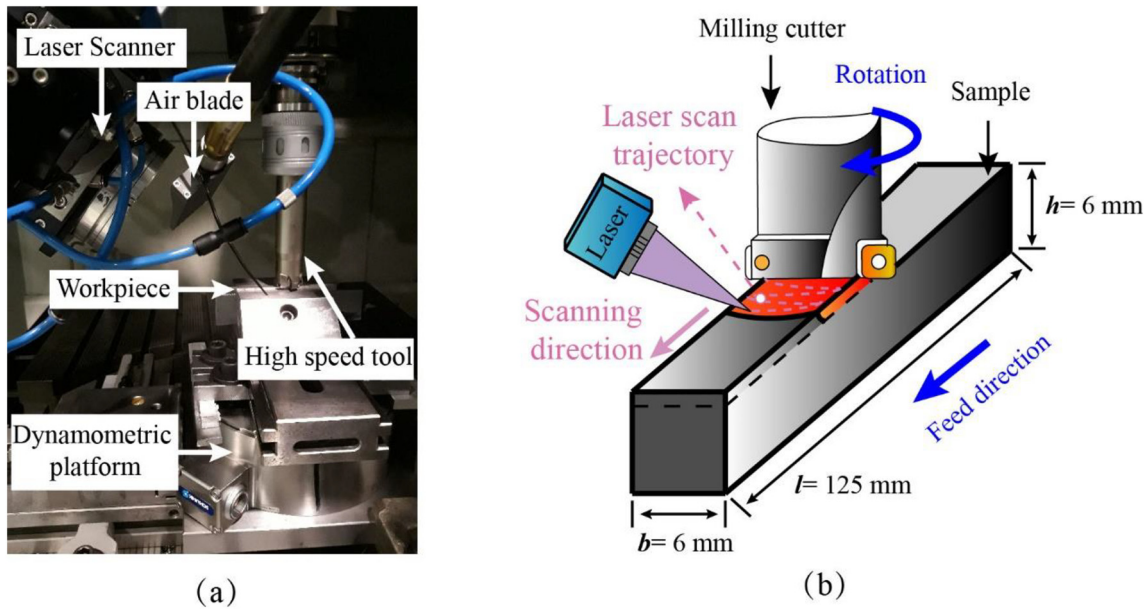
Employed laser equipment on a milling machine (a) and schematic of the setup (b).
